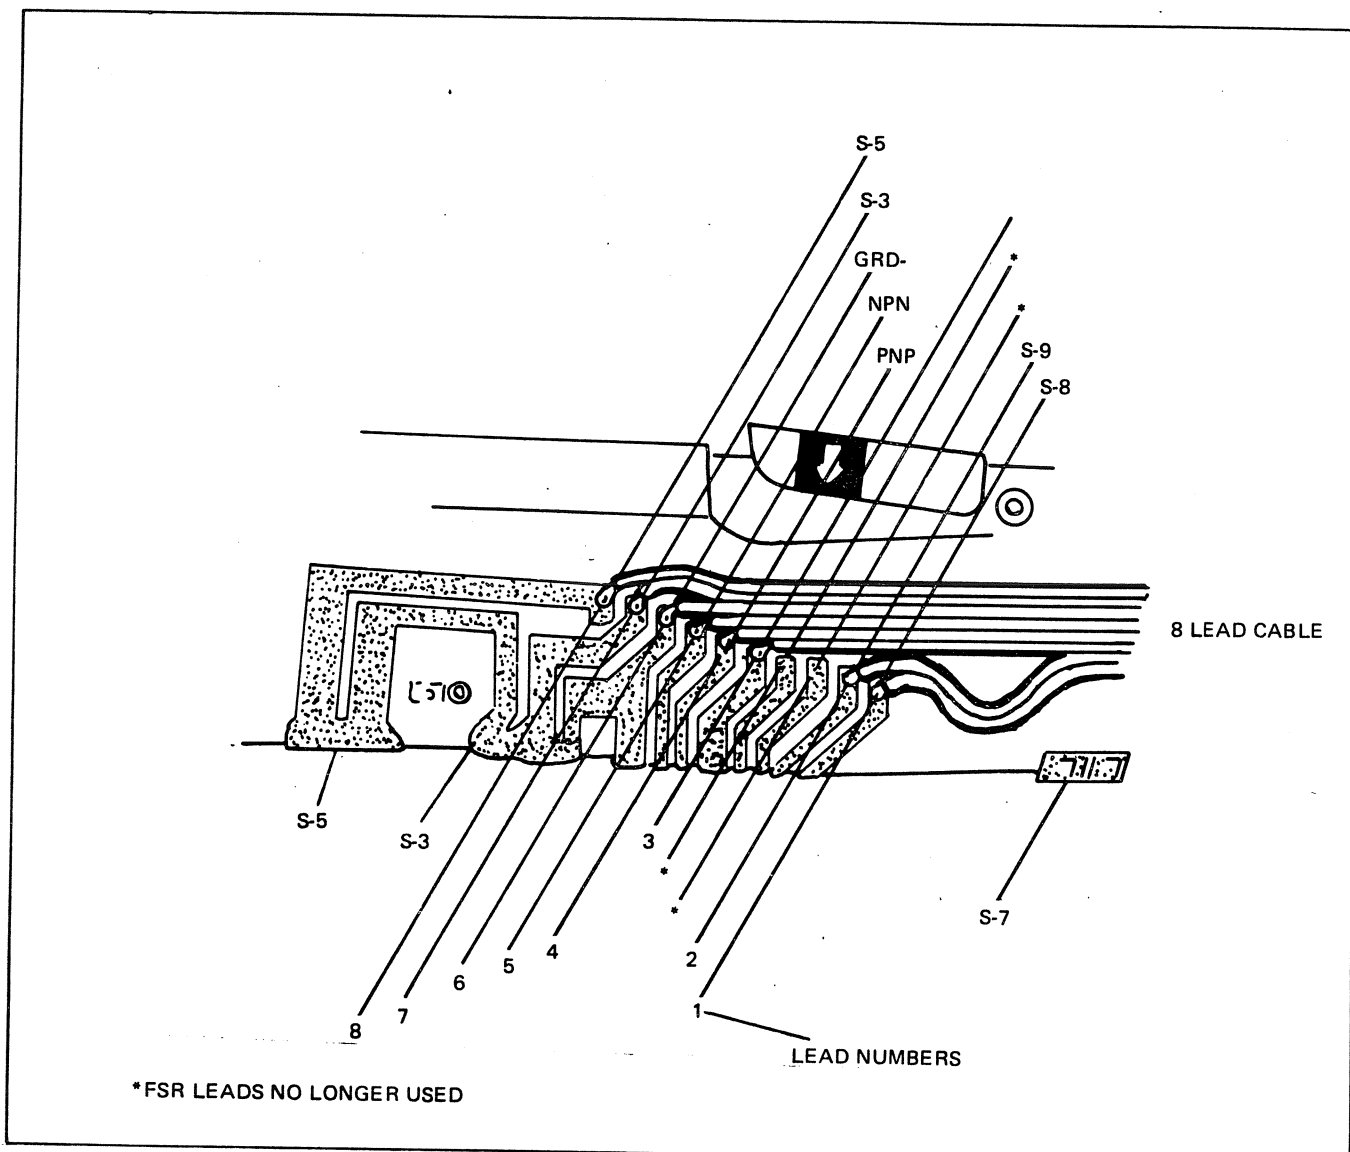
CONNECTING 8 WIRE SHUTTER CABLE TO 10 PAD FLEX CIRCUIT
